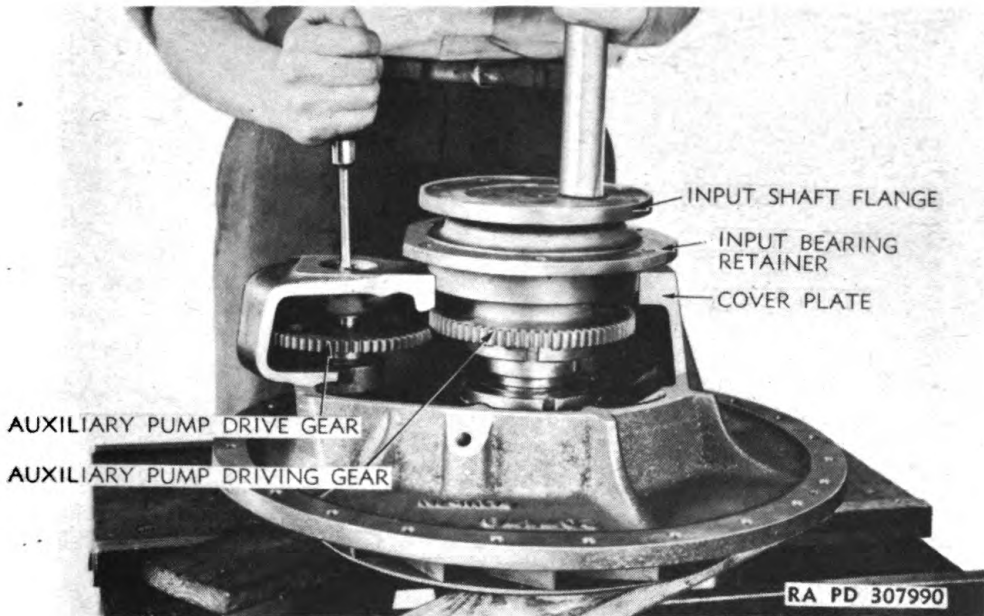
Installing Input Shaft Assembly in Cover Plate
